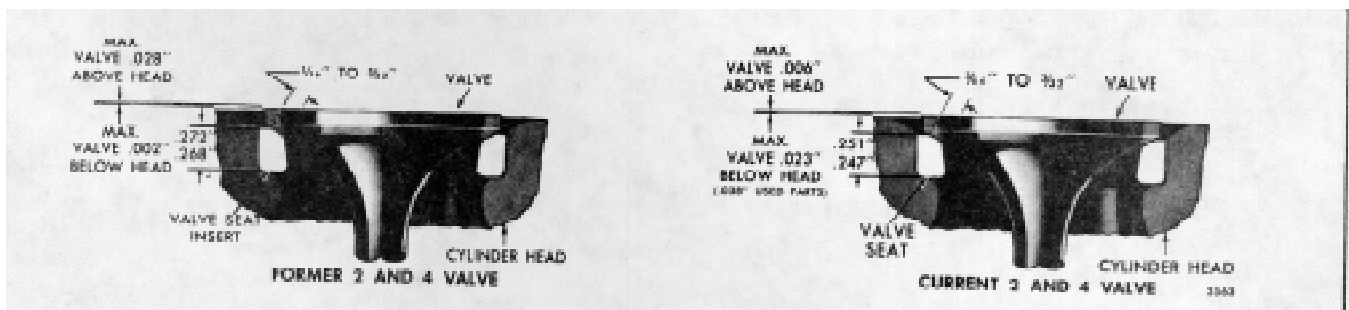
Relationship Between Exhaust Valve, Insert and Cylinder Head
